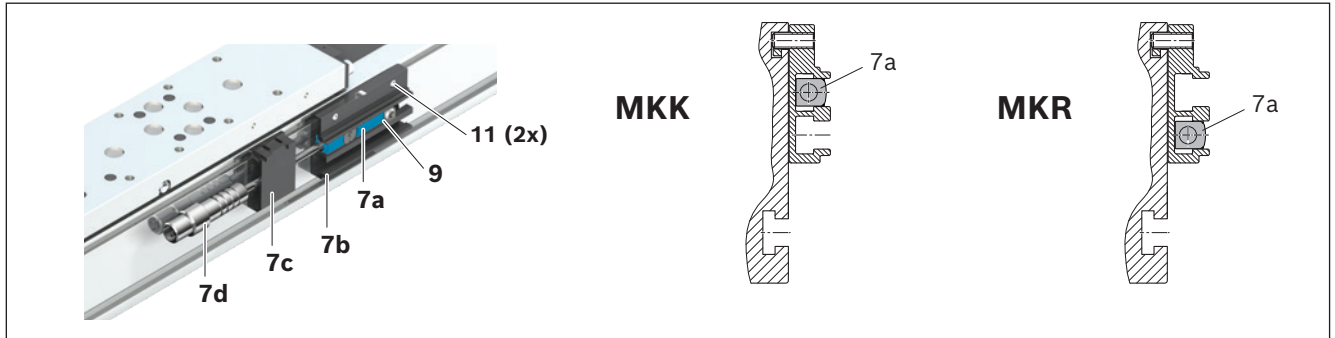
Installing the magnetic sensor (MKK/MKR-040-NN-3)
